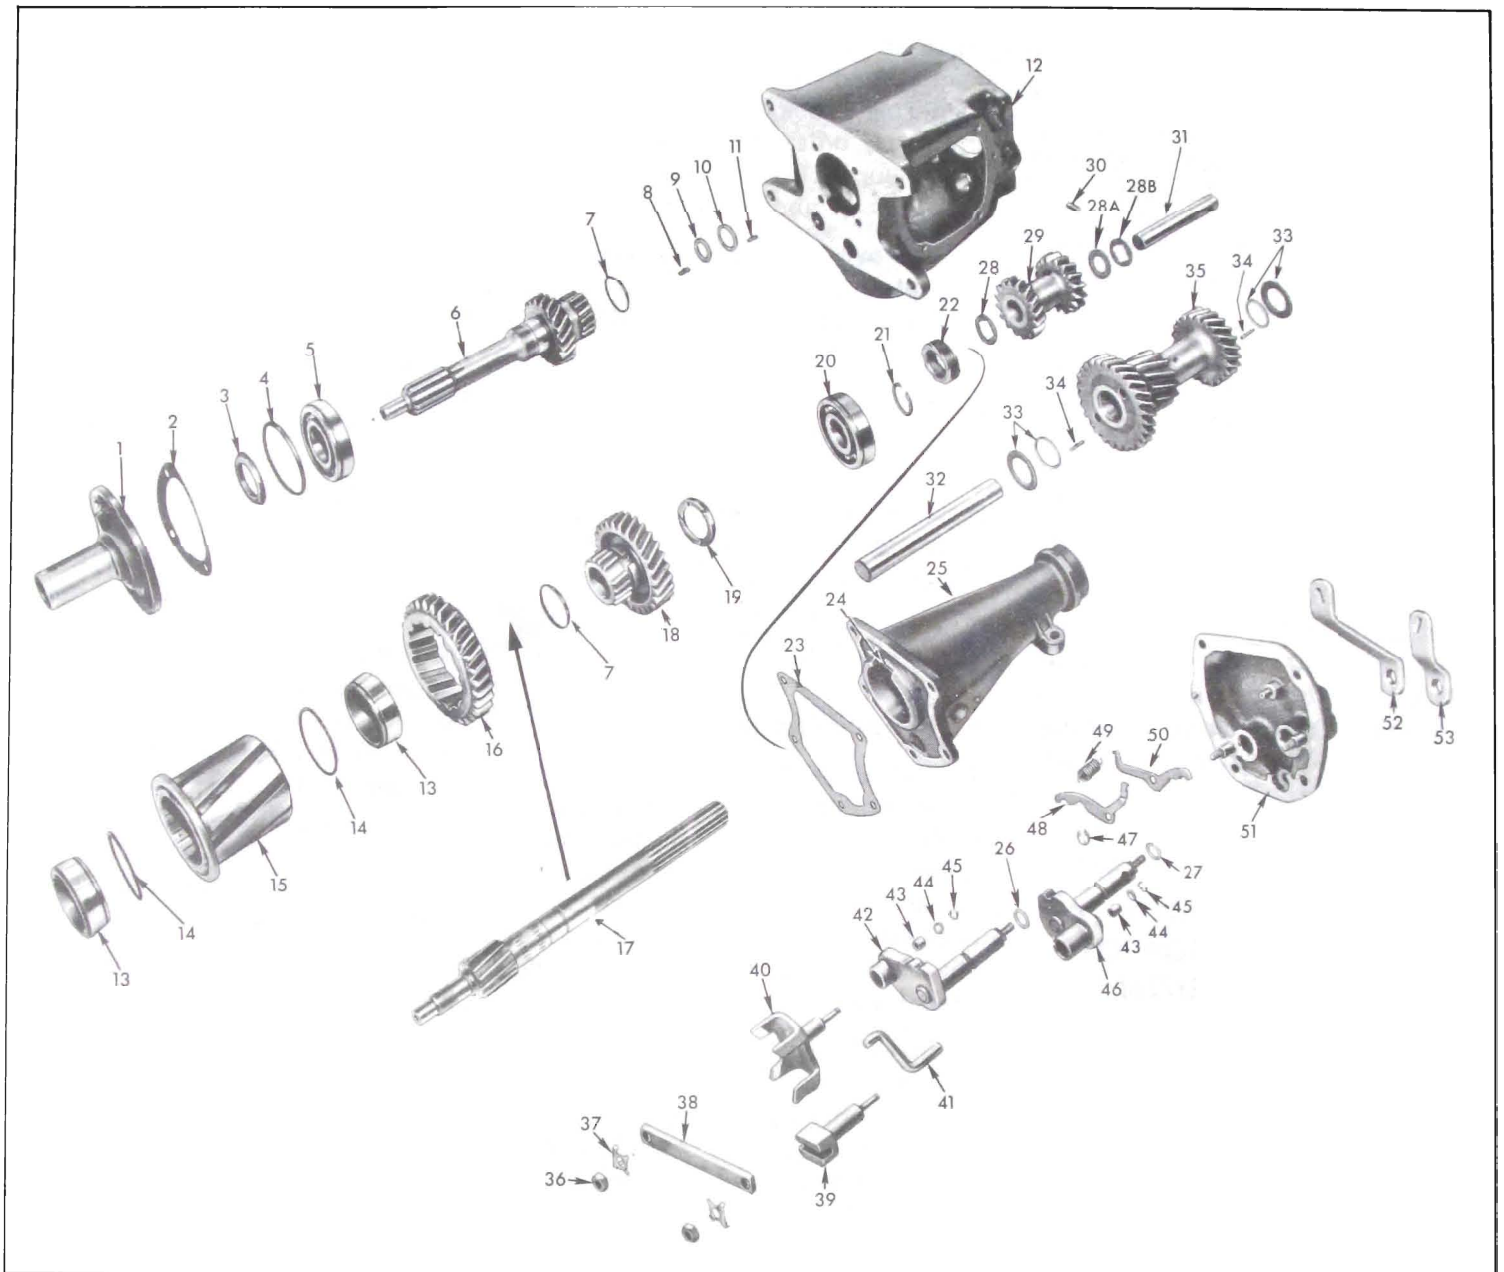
Exploded View of 3-Speed Synchromesh Transmission
